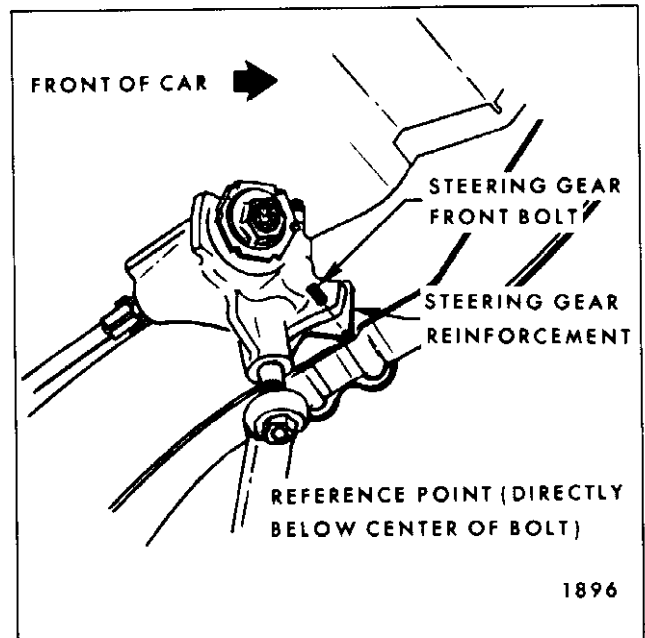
Ref. Point at Steering Gear Reinforcement
